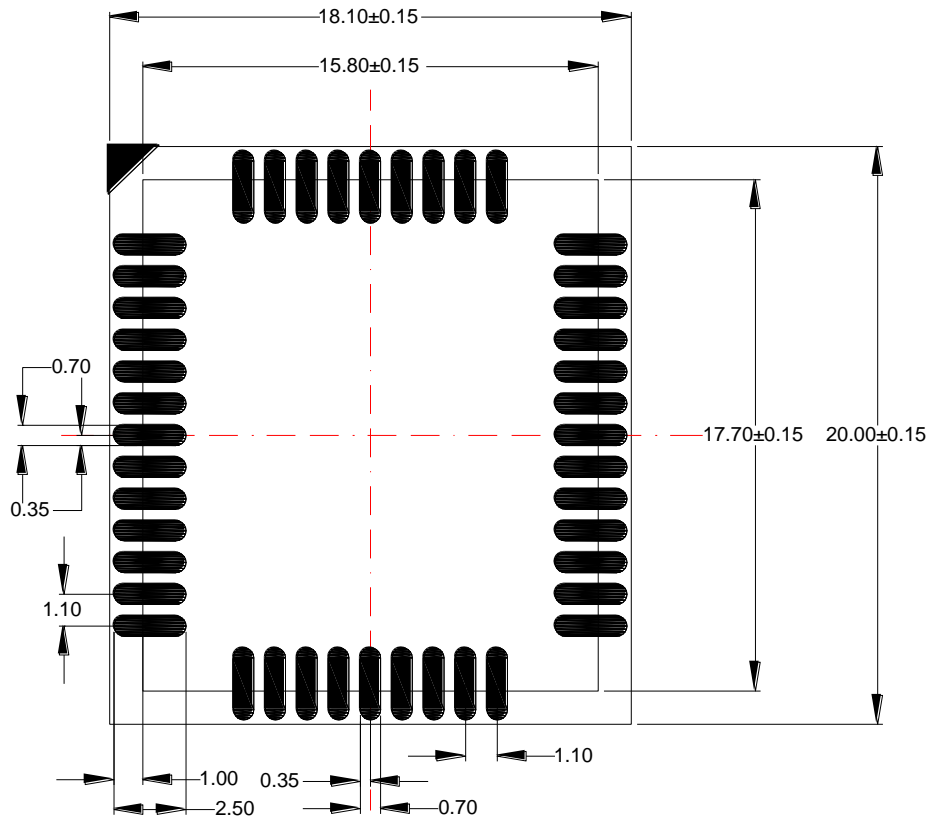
Recommended Stencil Design for M65 and M66 (Unit: mm)
